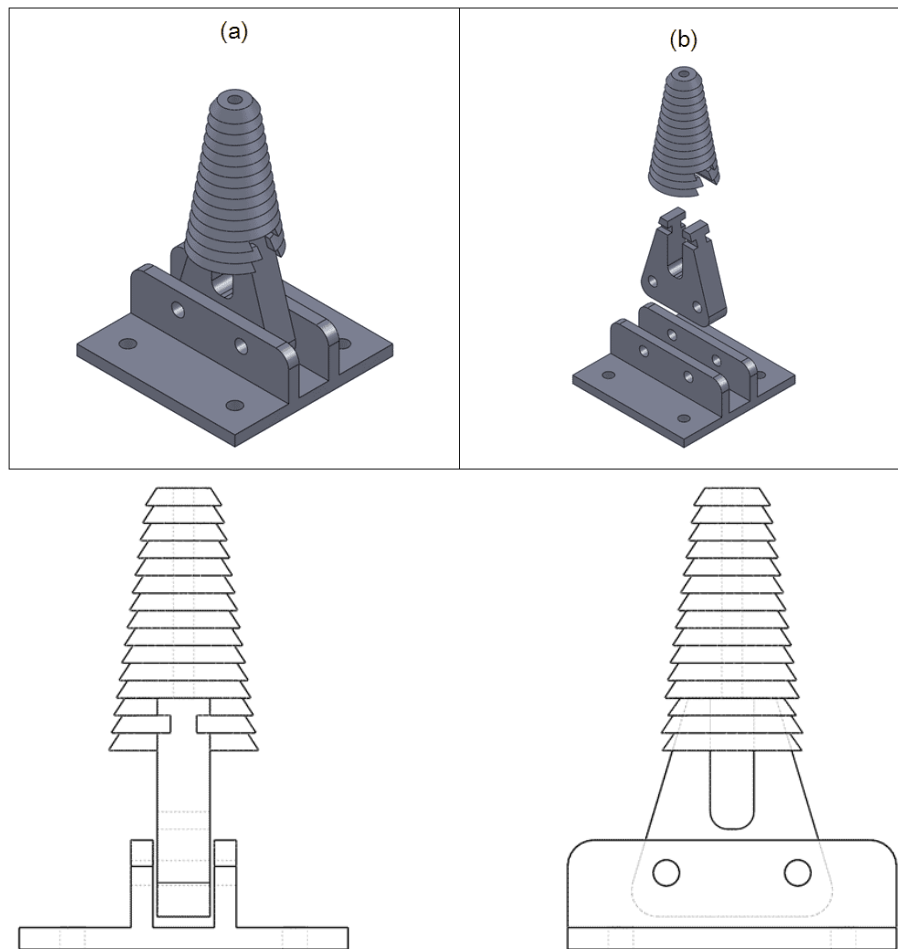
Frustroconical clamps for inflation tests: *Top* (a) one frustoconical clamps assembled, (b) Exploded assembly. *Bottom* Constructive details of the frustoconical clamp.
